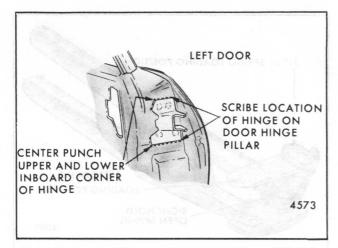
Locating Hinge on Door Hinge Pillar - "X" Styles
